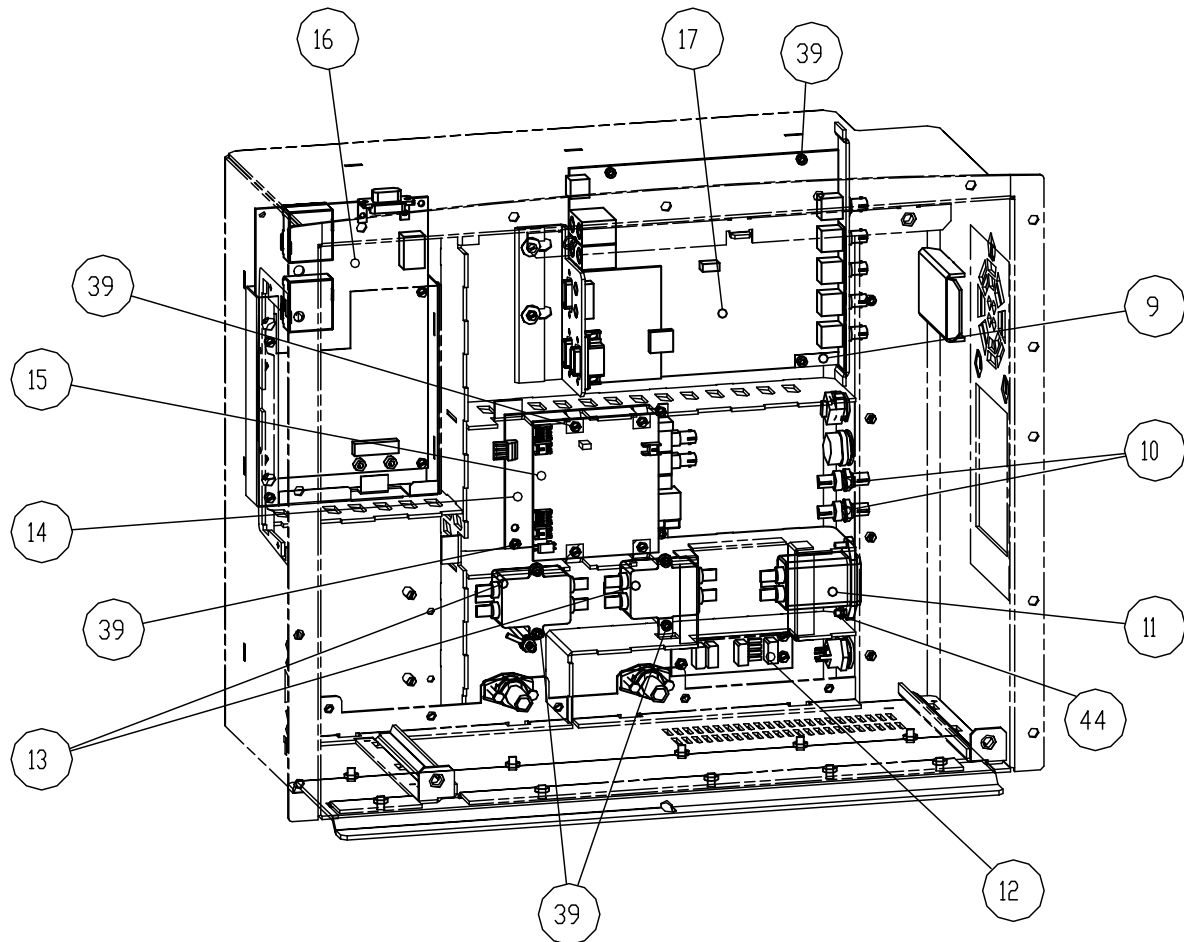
Exploded view of the MRI Shield, Back shell, PC boards and components
